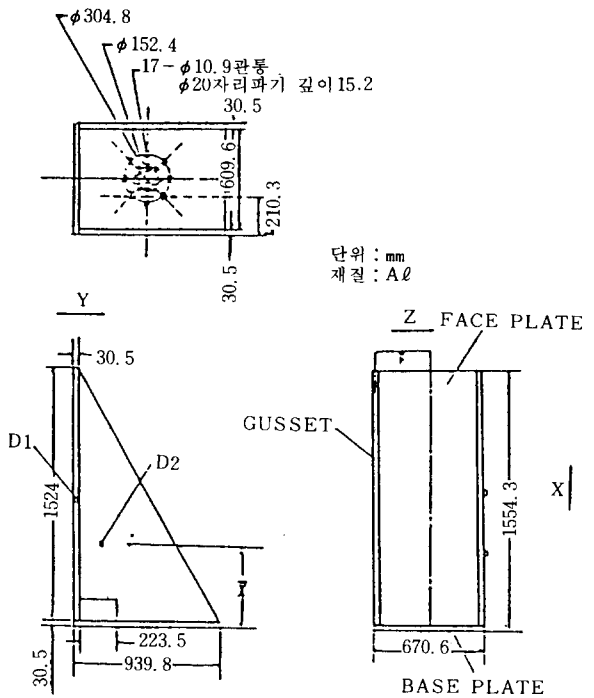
Dimension and Shape of Complex Shaped Fixture IV
